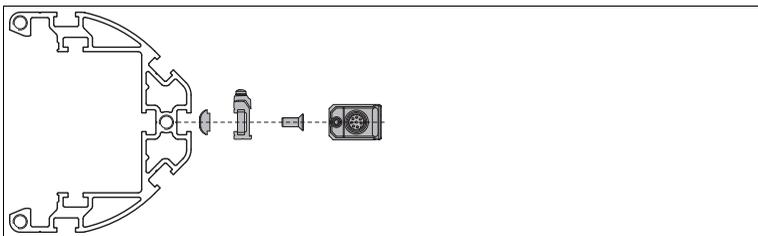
Example of mounting a mounting aid OMH-SLCT-03 or OMH-SLCT-04 to a mounting column
